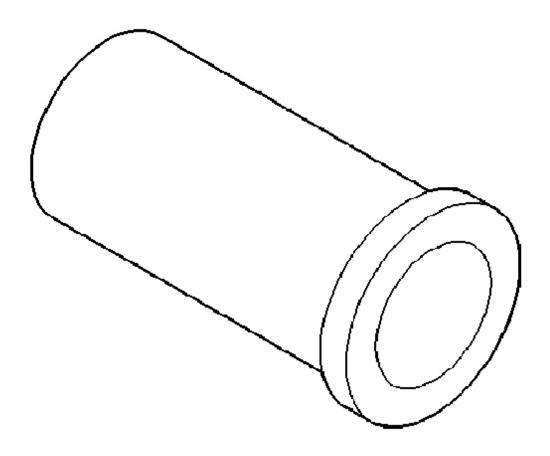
Driver 6342 Courtesy of CHRYSLER LLC
